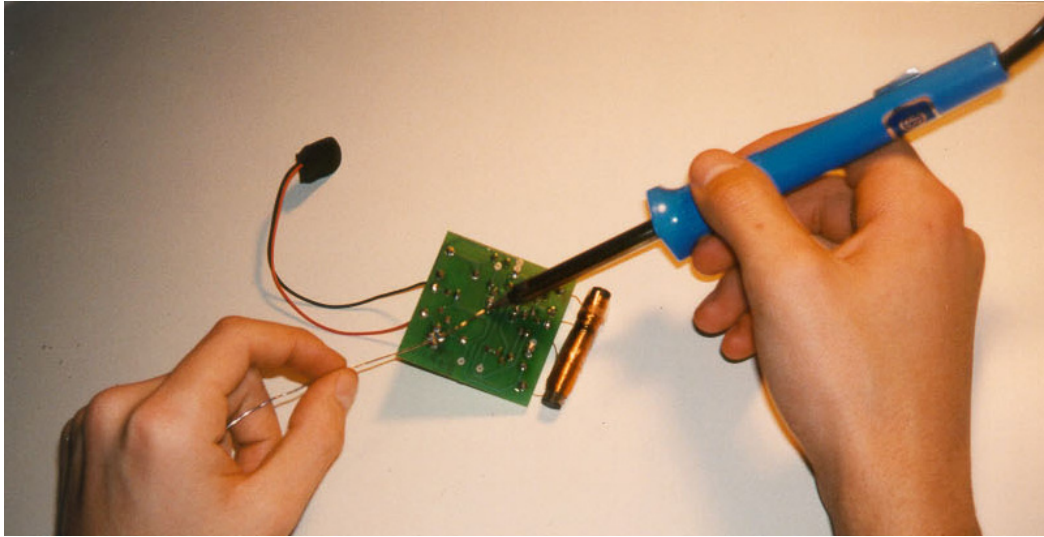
Soldering of the metal detectors components using a soldering iron
